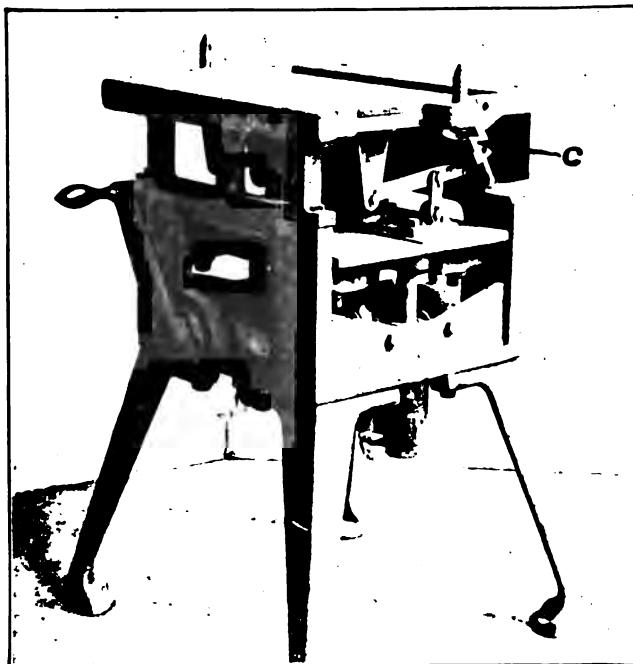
Nowel or Drag Stripping-Plate Hand-Rammed Molding Machine
